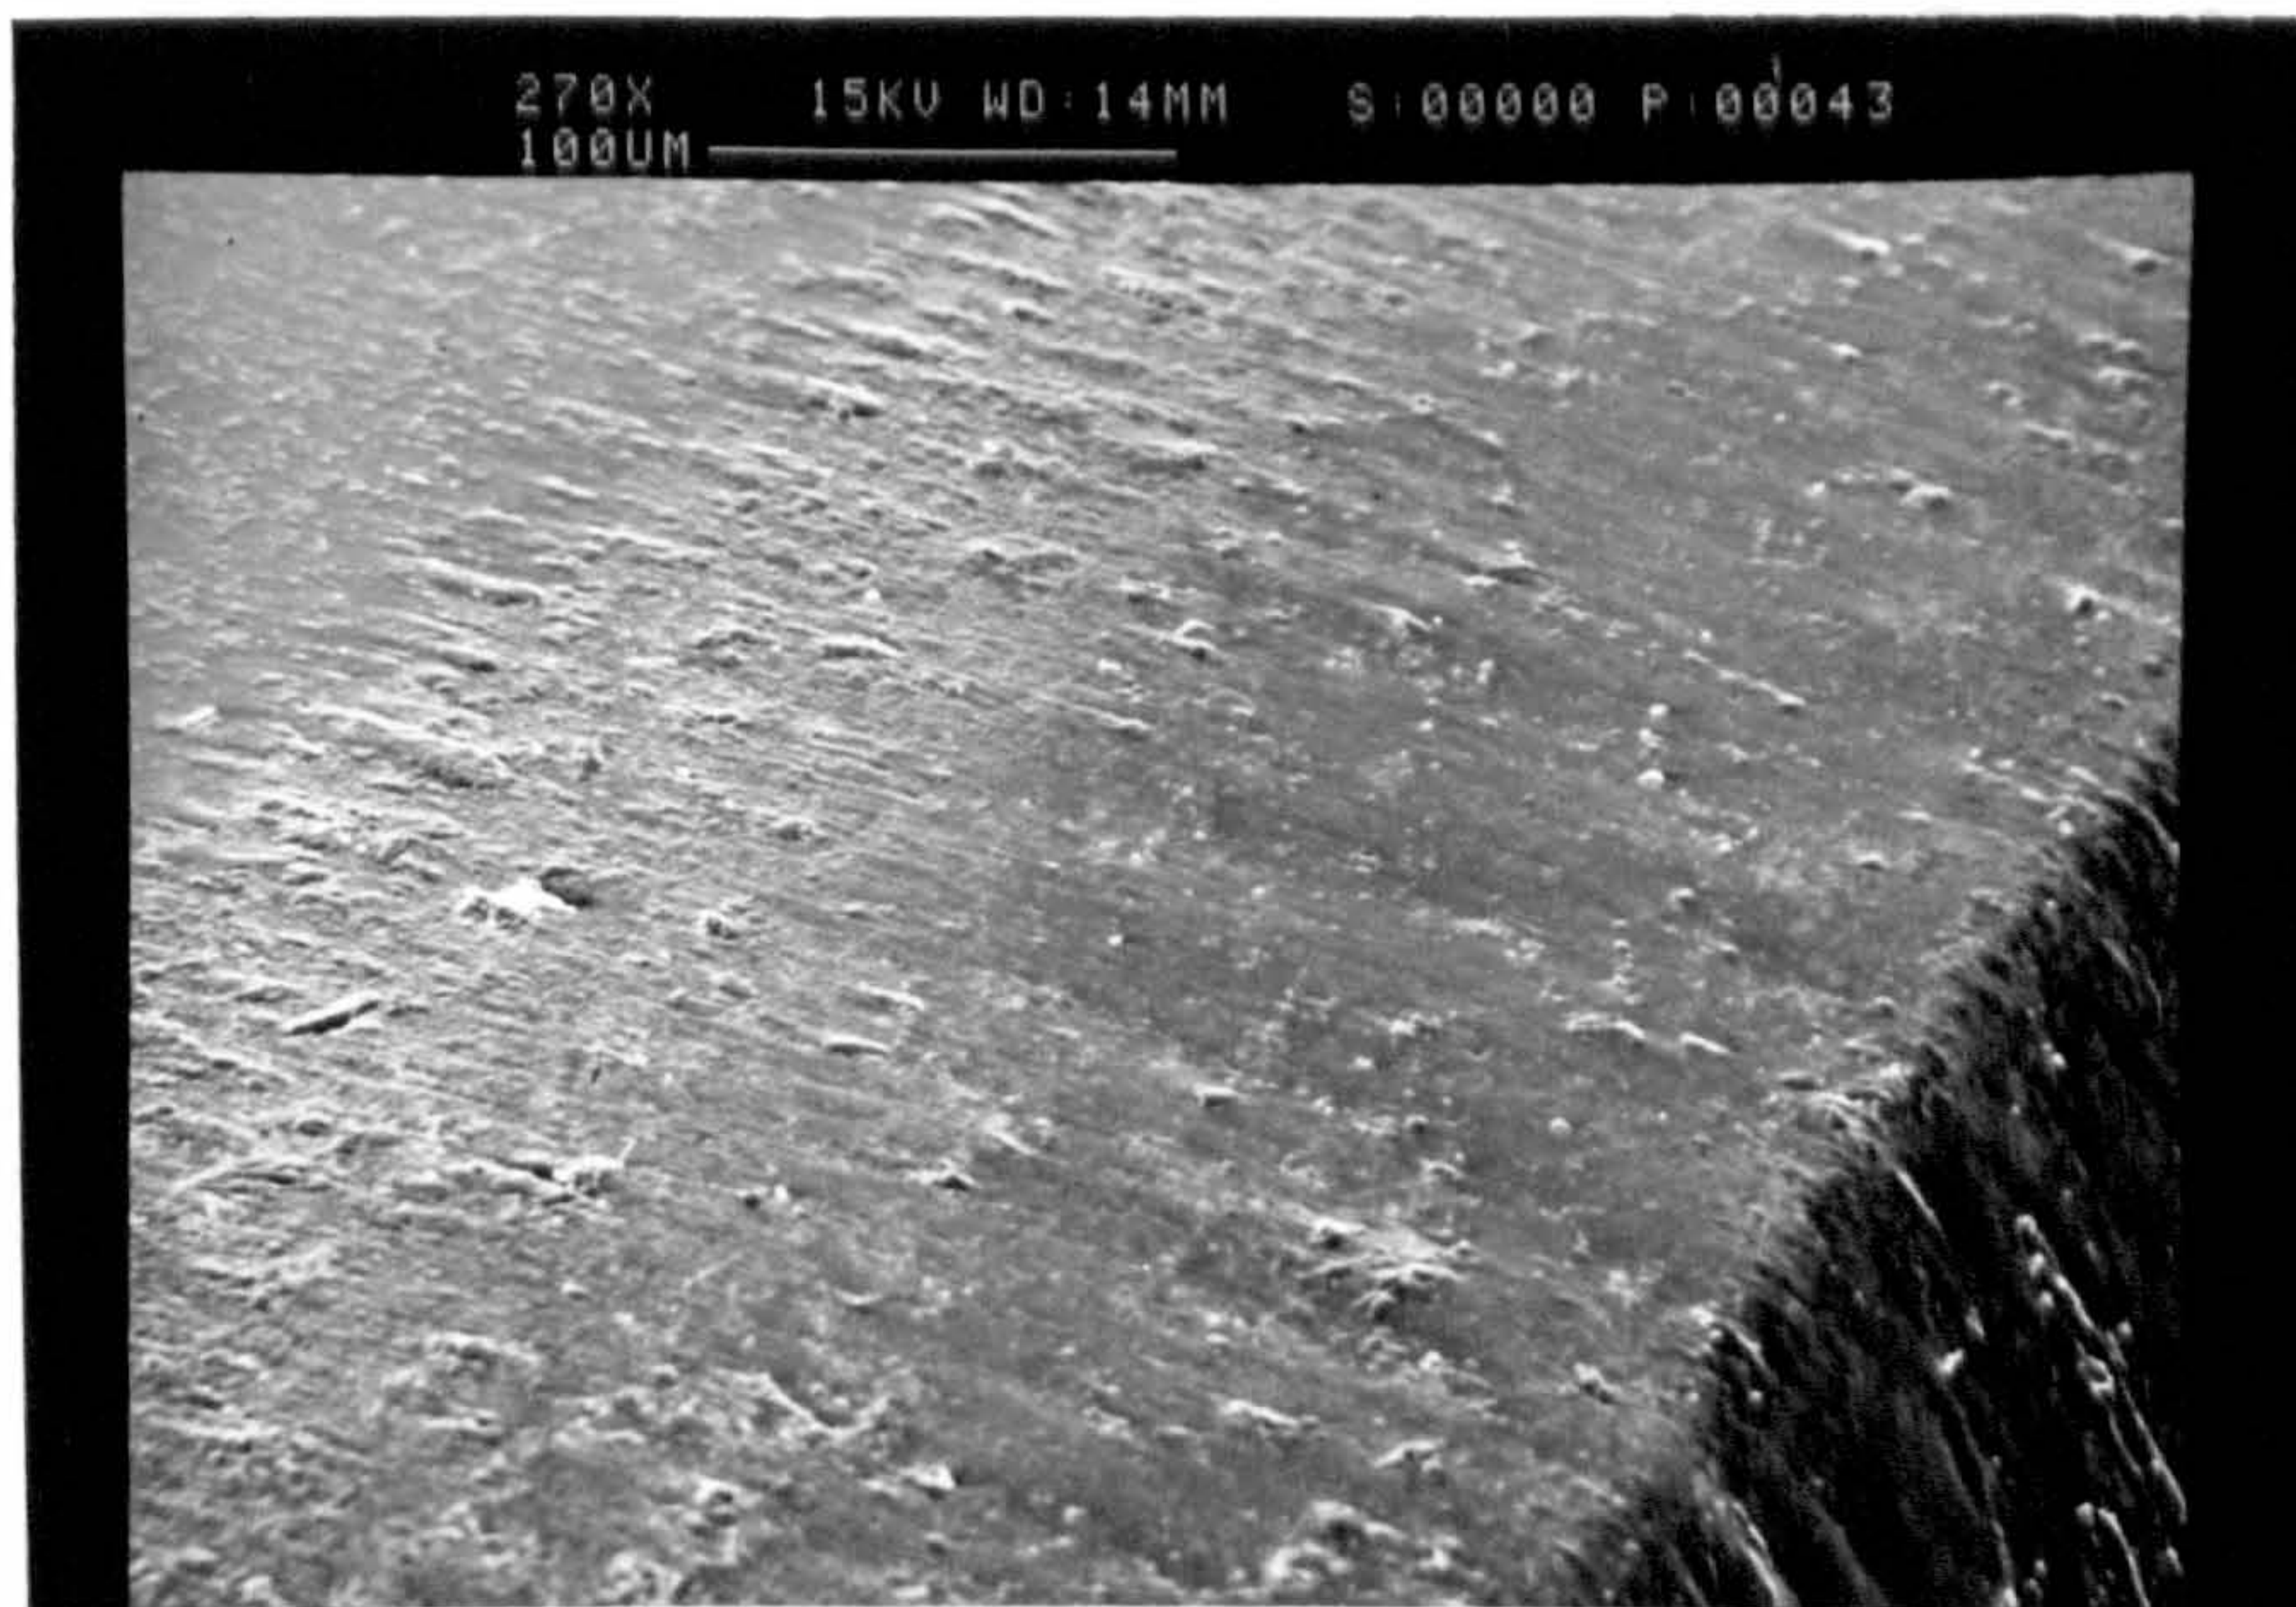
Smooth rake face of worn HSS tool showing no crater formation.
